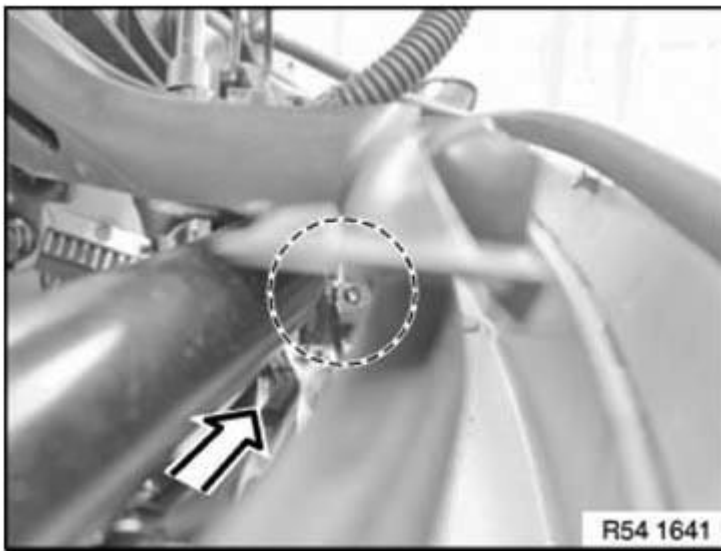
Installing Tip Of Special Tool Through Bore Hole
